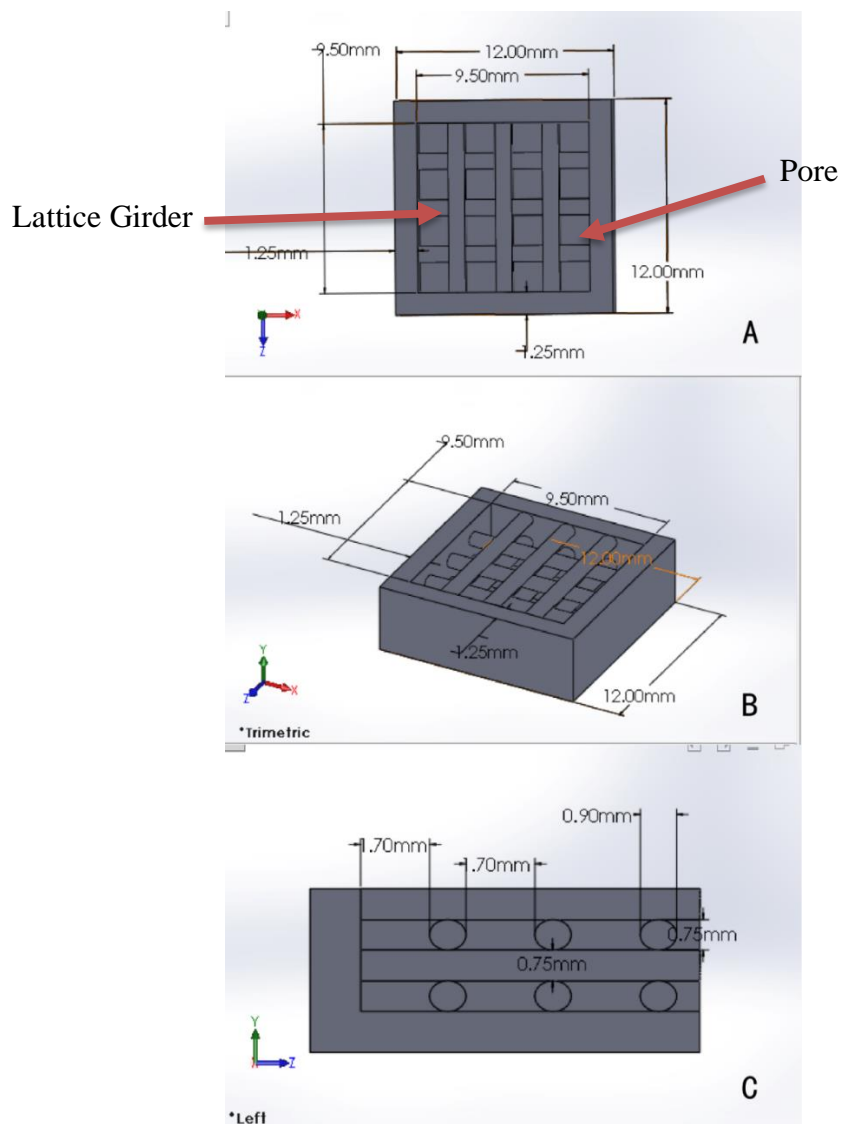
3D printing design. (A) Top view. (B) Trimetric view. (C) Left cut view.
